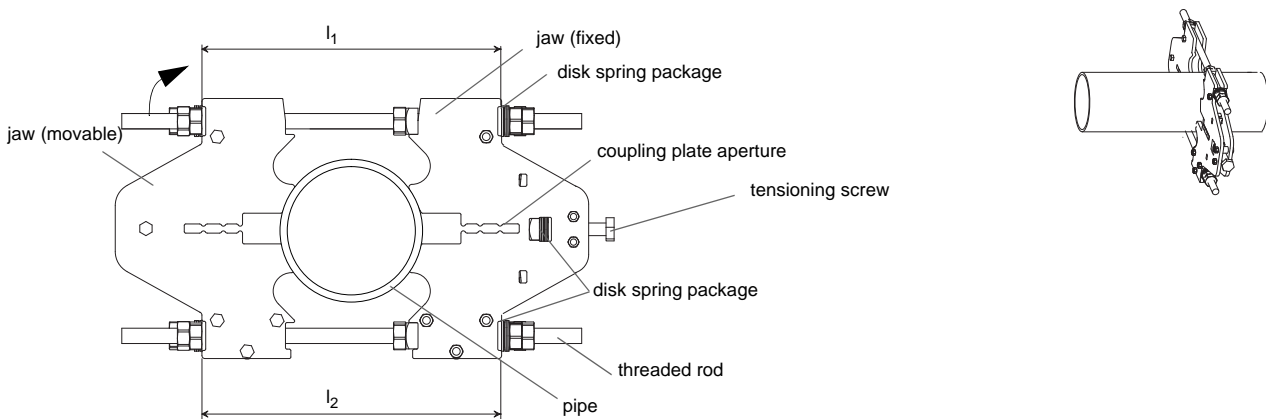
Pipe mounting fixture mounted on the pipe (front view)
